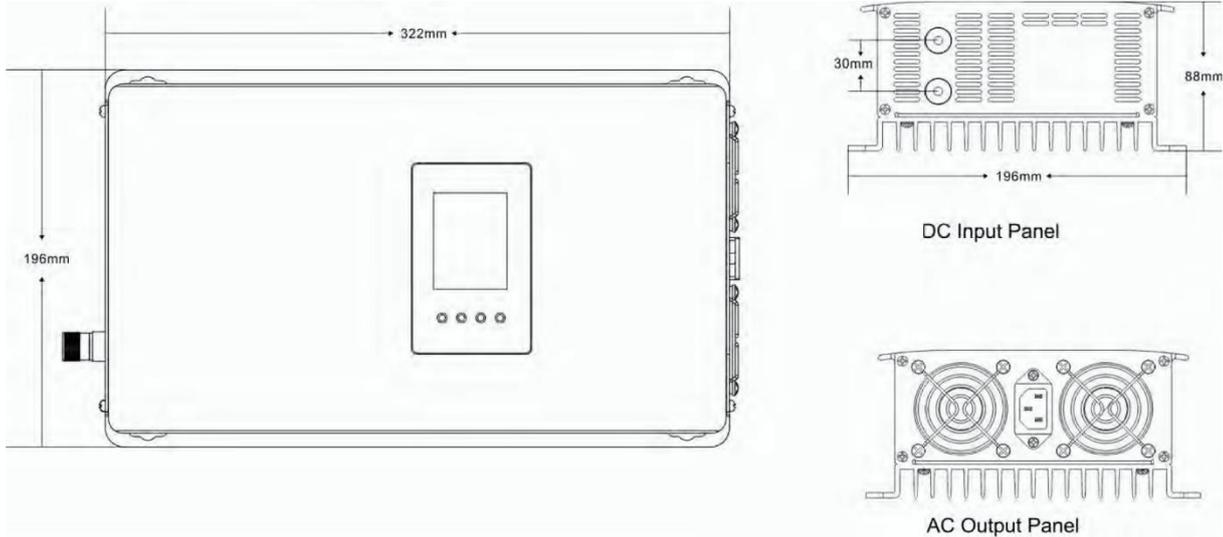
GF-SUN-1000G2(H) Outline Drawing
